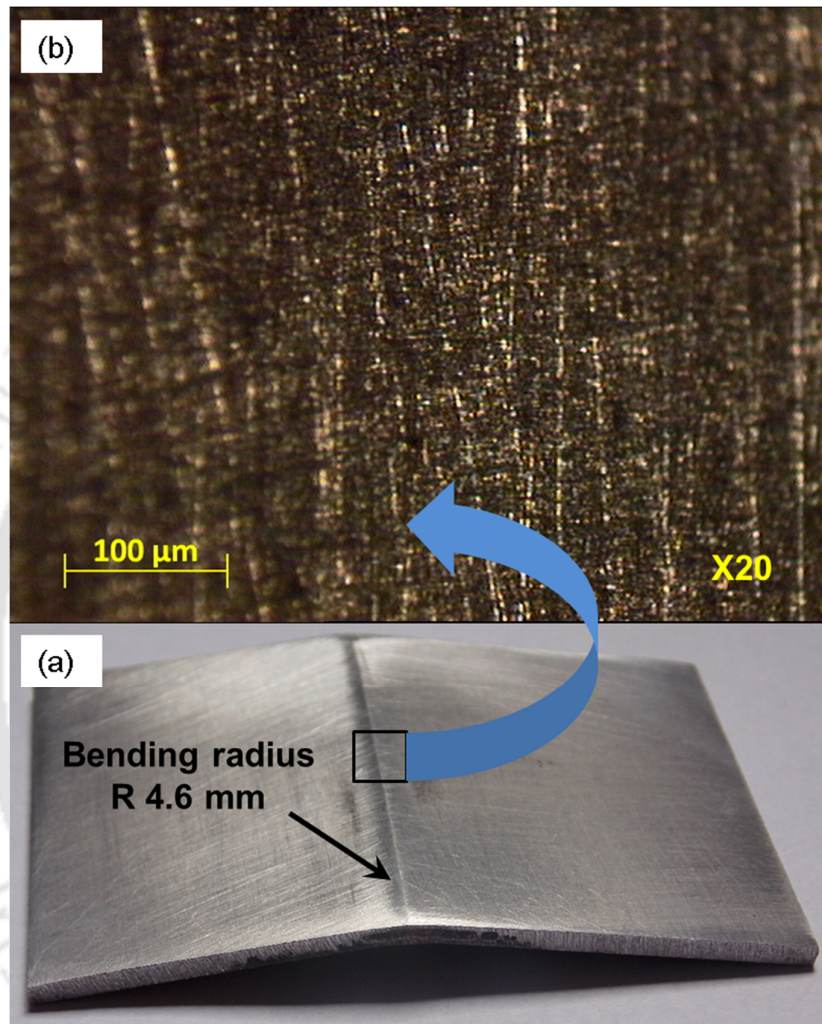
Laser bending of magnesium alloys (a) bent specimen and (b) magnified image.
